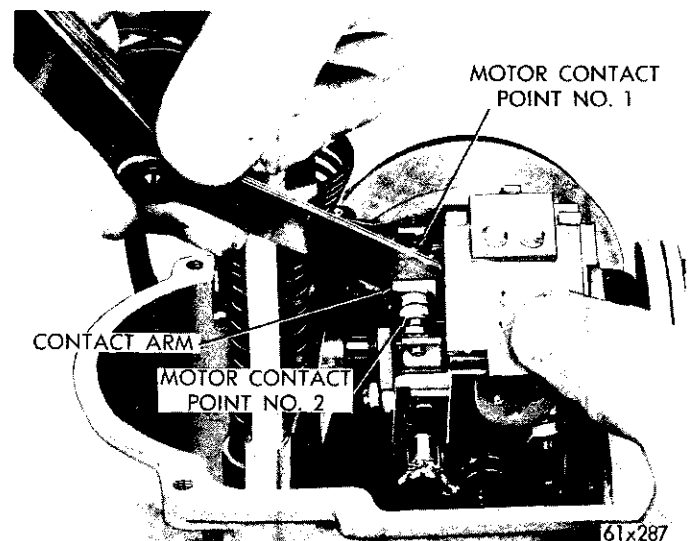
Measuring Clearance between the Motor Contact Point #1 and the Contact Arm
